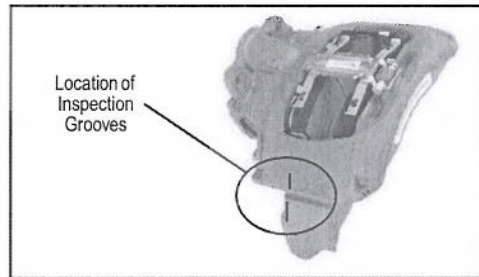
STYLE C - NOTCHED CARRIER AND CALIPER
